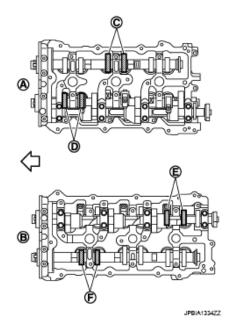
Locating Exhaust Cam Nose On No. 1 Cylinder Courtesy of NISSAN MOTOR CO., U.S.A.
